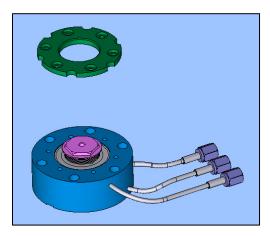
Removing Clamp Ring from Pneumatic Cylinder
